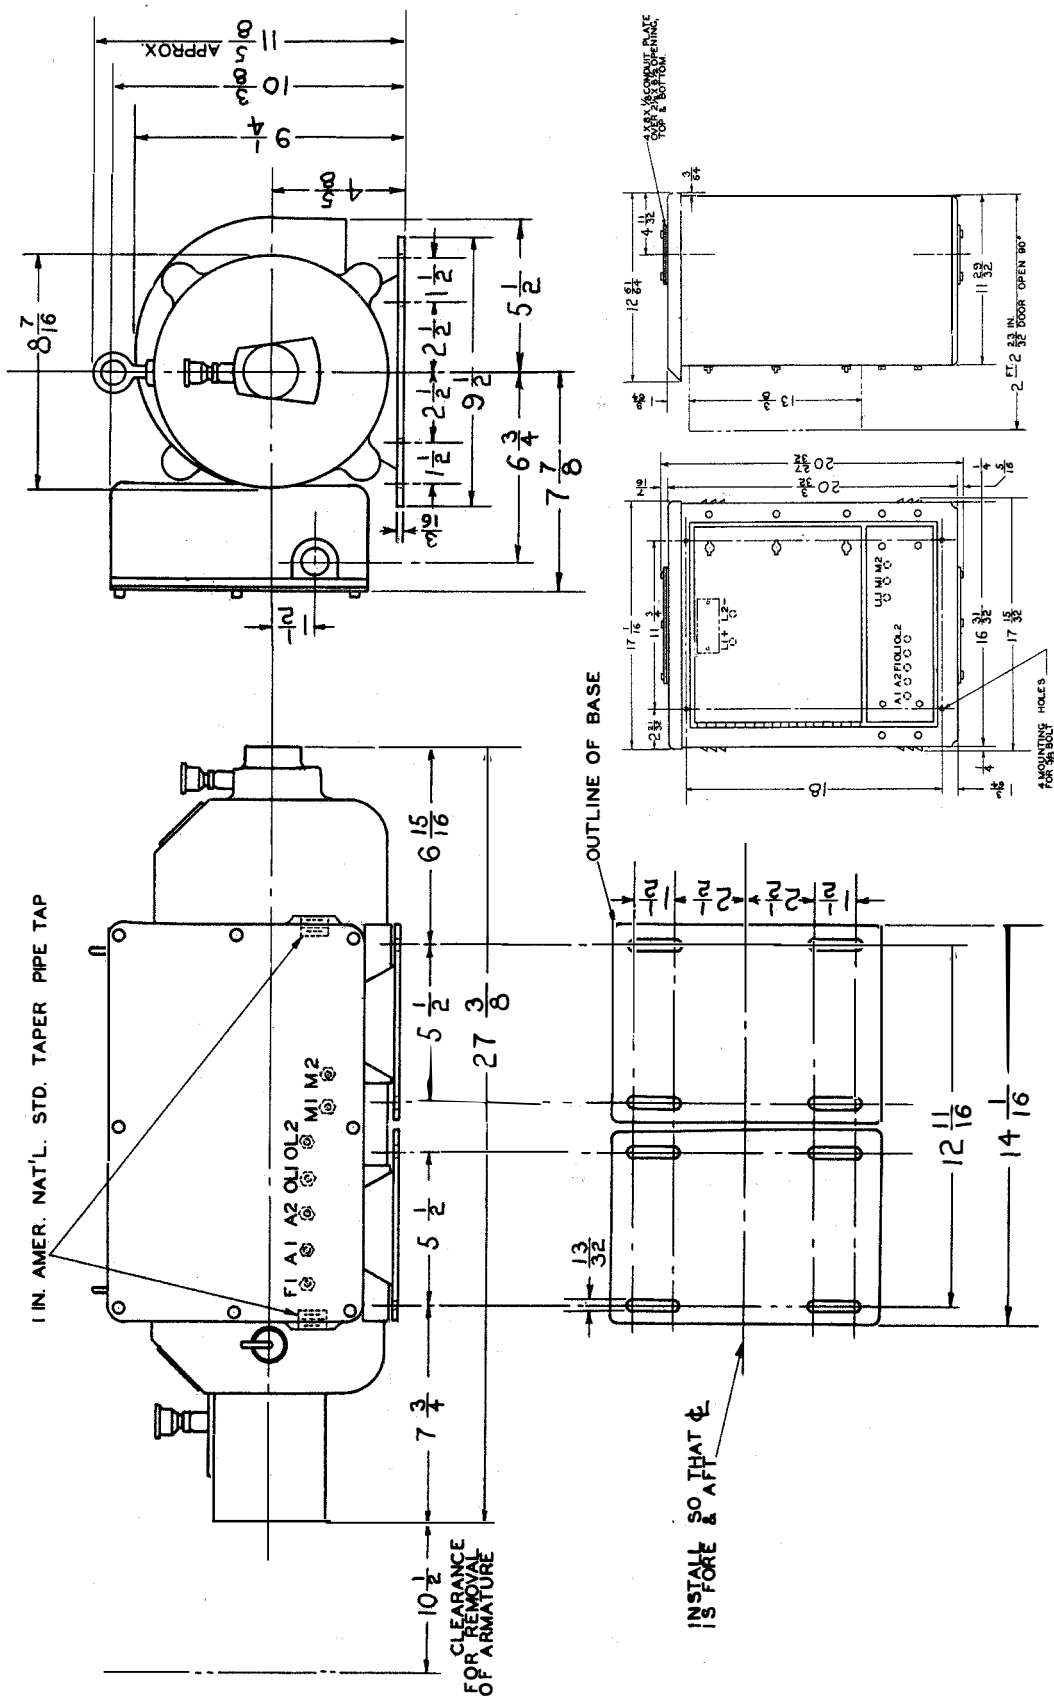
Type CG-211092 Motor Generator and Type CG-211090 Magnetic Controller (Outline)
